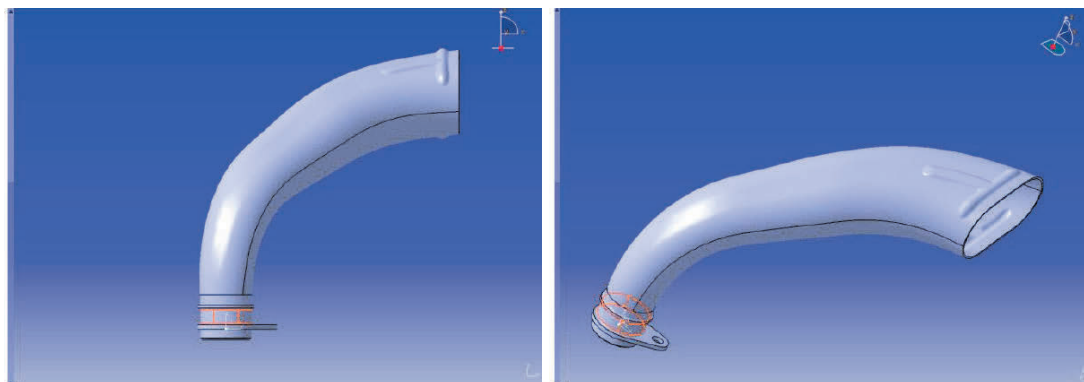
Diffuser turboprop engine, currently made by traditional methods: press forming of two halves and welding
